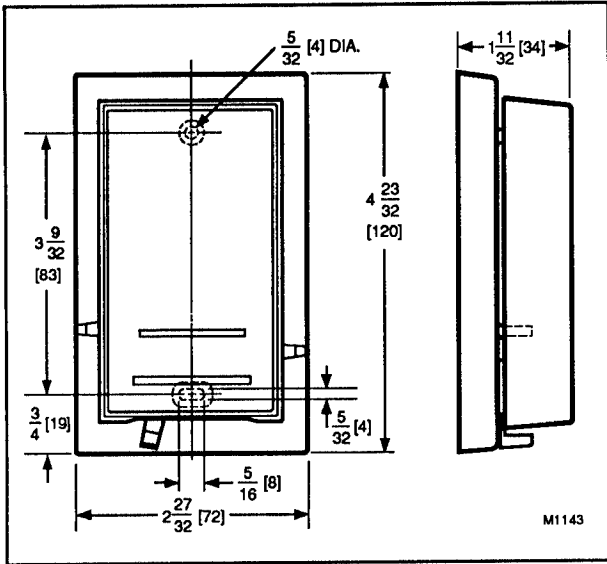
APPROXIMATE DIMENSIONS IN in. [mm] OF T834C. T8034C DIMENSIONS ARE THE SAME, EXCEPT IT MOUNTS HORIZONTALLY.
